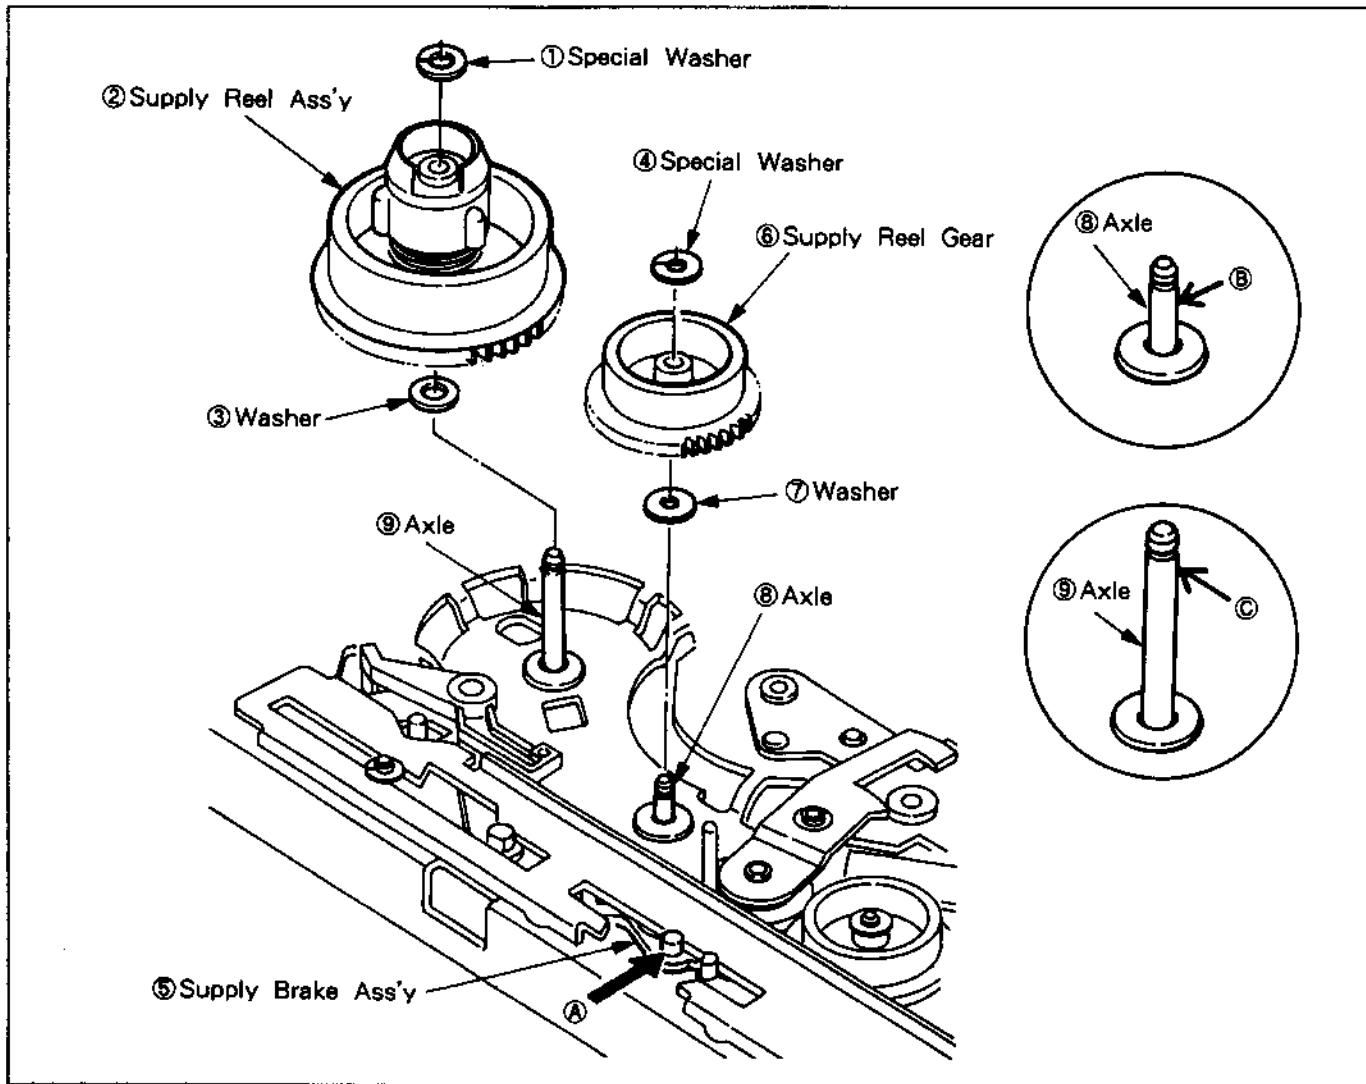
Supply Reel Ass'y & Supply Reel Gear
